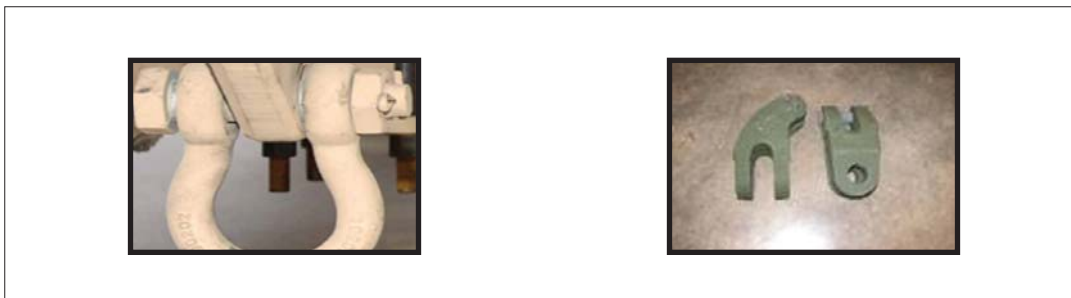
Shackle bolt (NSN 4030-01-187-0964) and adapter (NSN 2540-00-863-3153)
